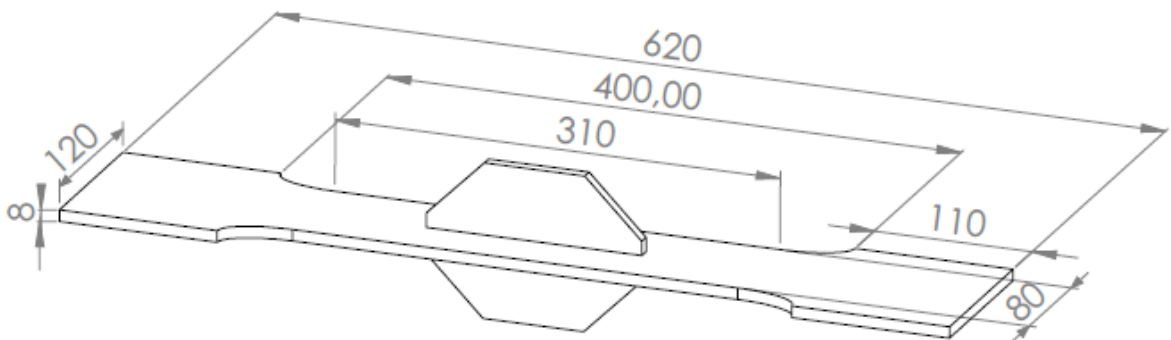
Main shape and dimensions (in mm) of the welded joint for steel grades S355, S700 and S1100.
